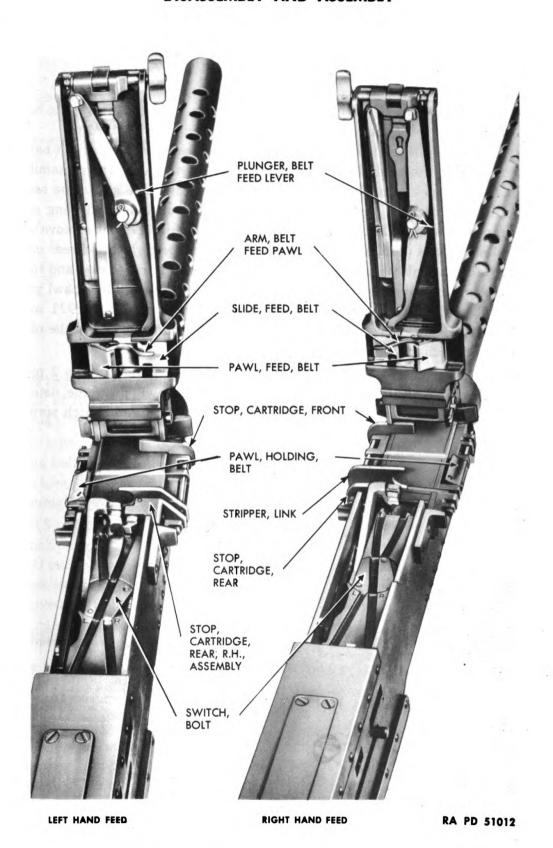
Position Of Parts For Right- And Left-Hand Feed
